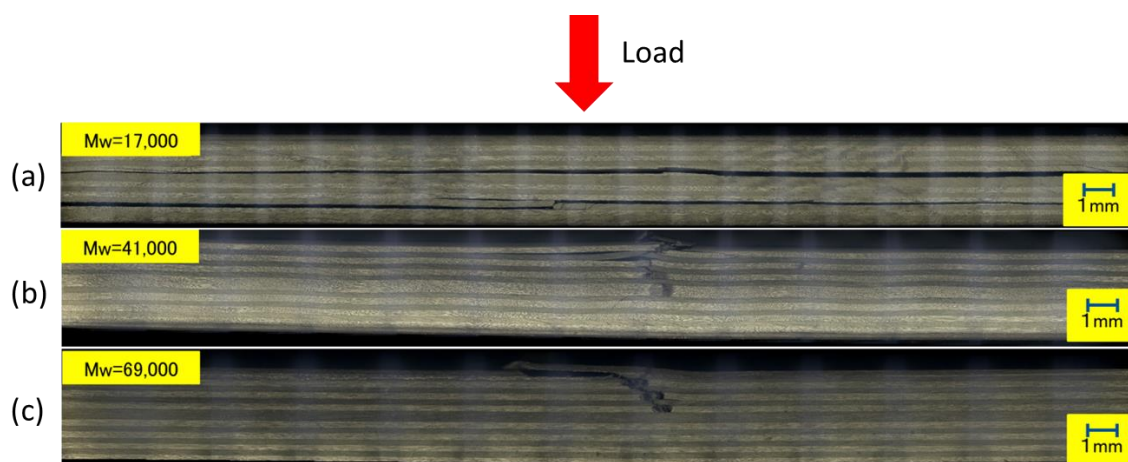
Side view of sheet type UD-CF/TPEP Bending failure of each Mw.
